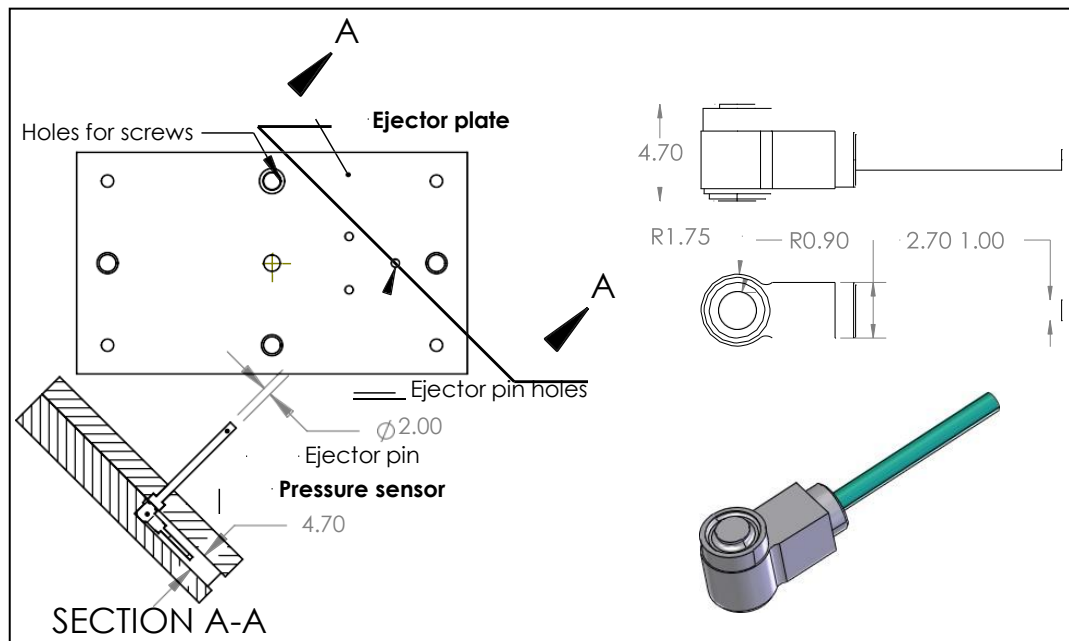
Dimensional details and cross section drawings of the ejector plate for the attachment of the Kistler 9210AA sensor. The sensor sits behind the ejector pin to measure cavity pressures. All dimensions are in mm unless otherwise specified.
